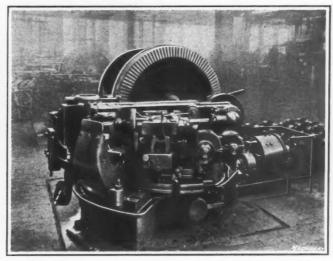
Gleason Templet Gear Planer planing Bevel Main Drive Gears
